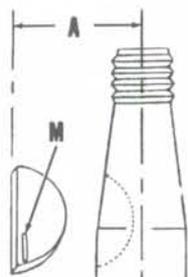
When installing breaker point cam and flywheel drive key, make certain that the upset mark (M) is down as shown.
